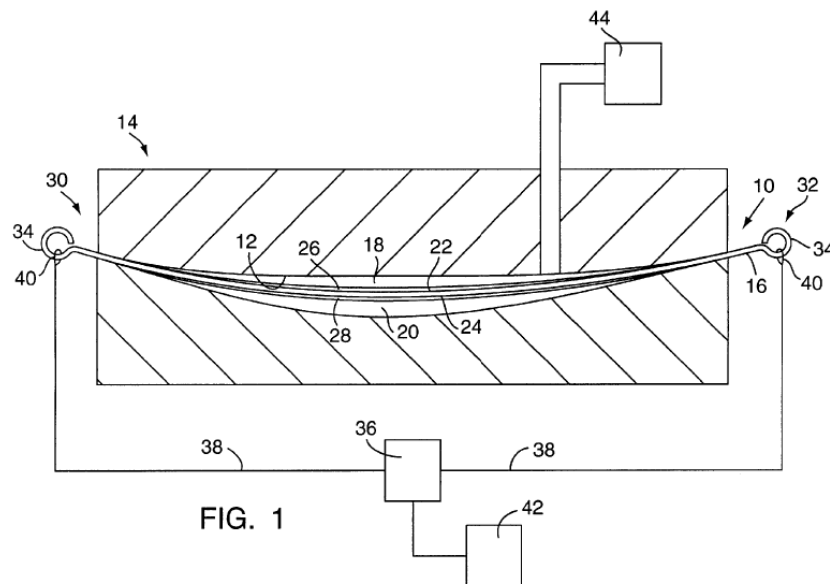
Manufacturing of hybrid leaf spring in compression mold [113]
